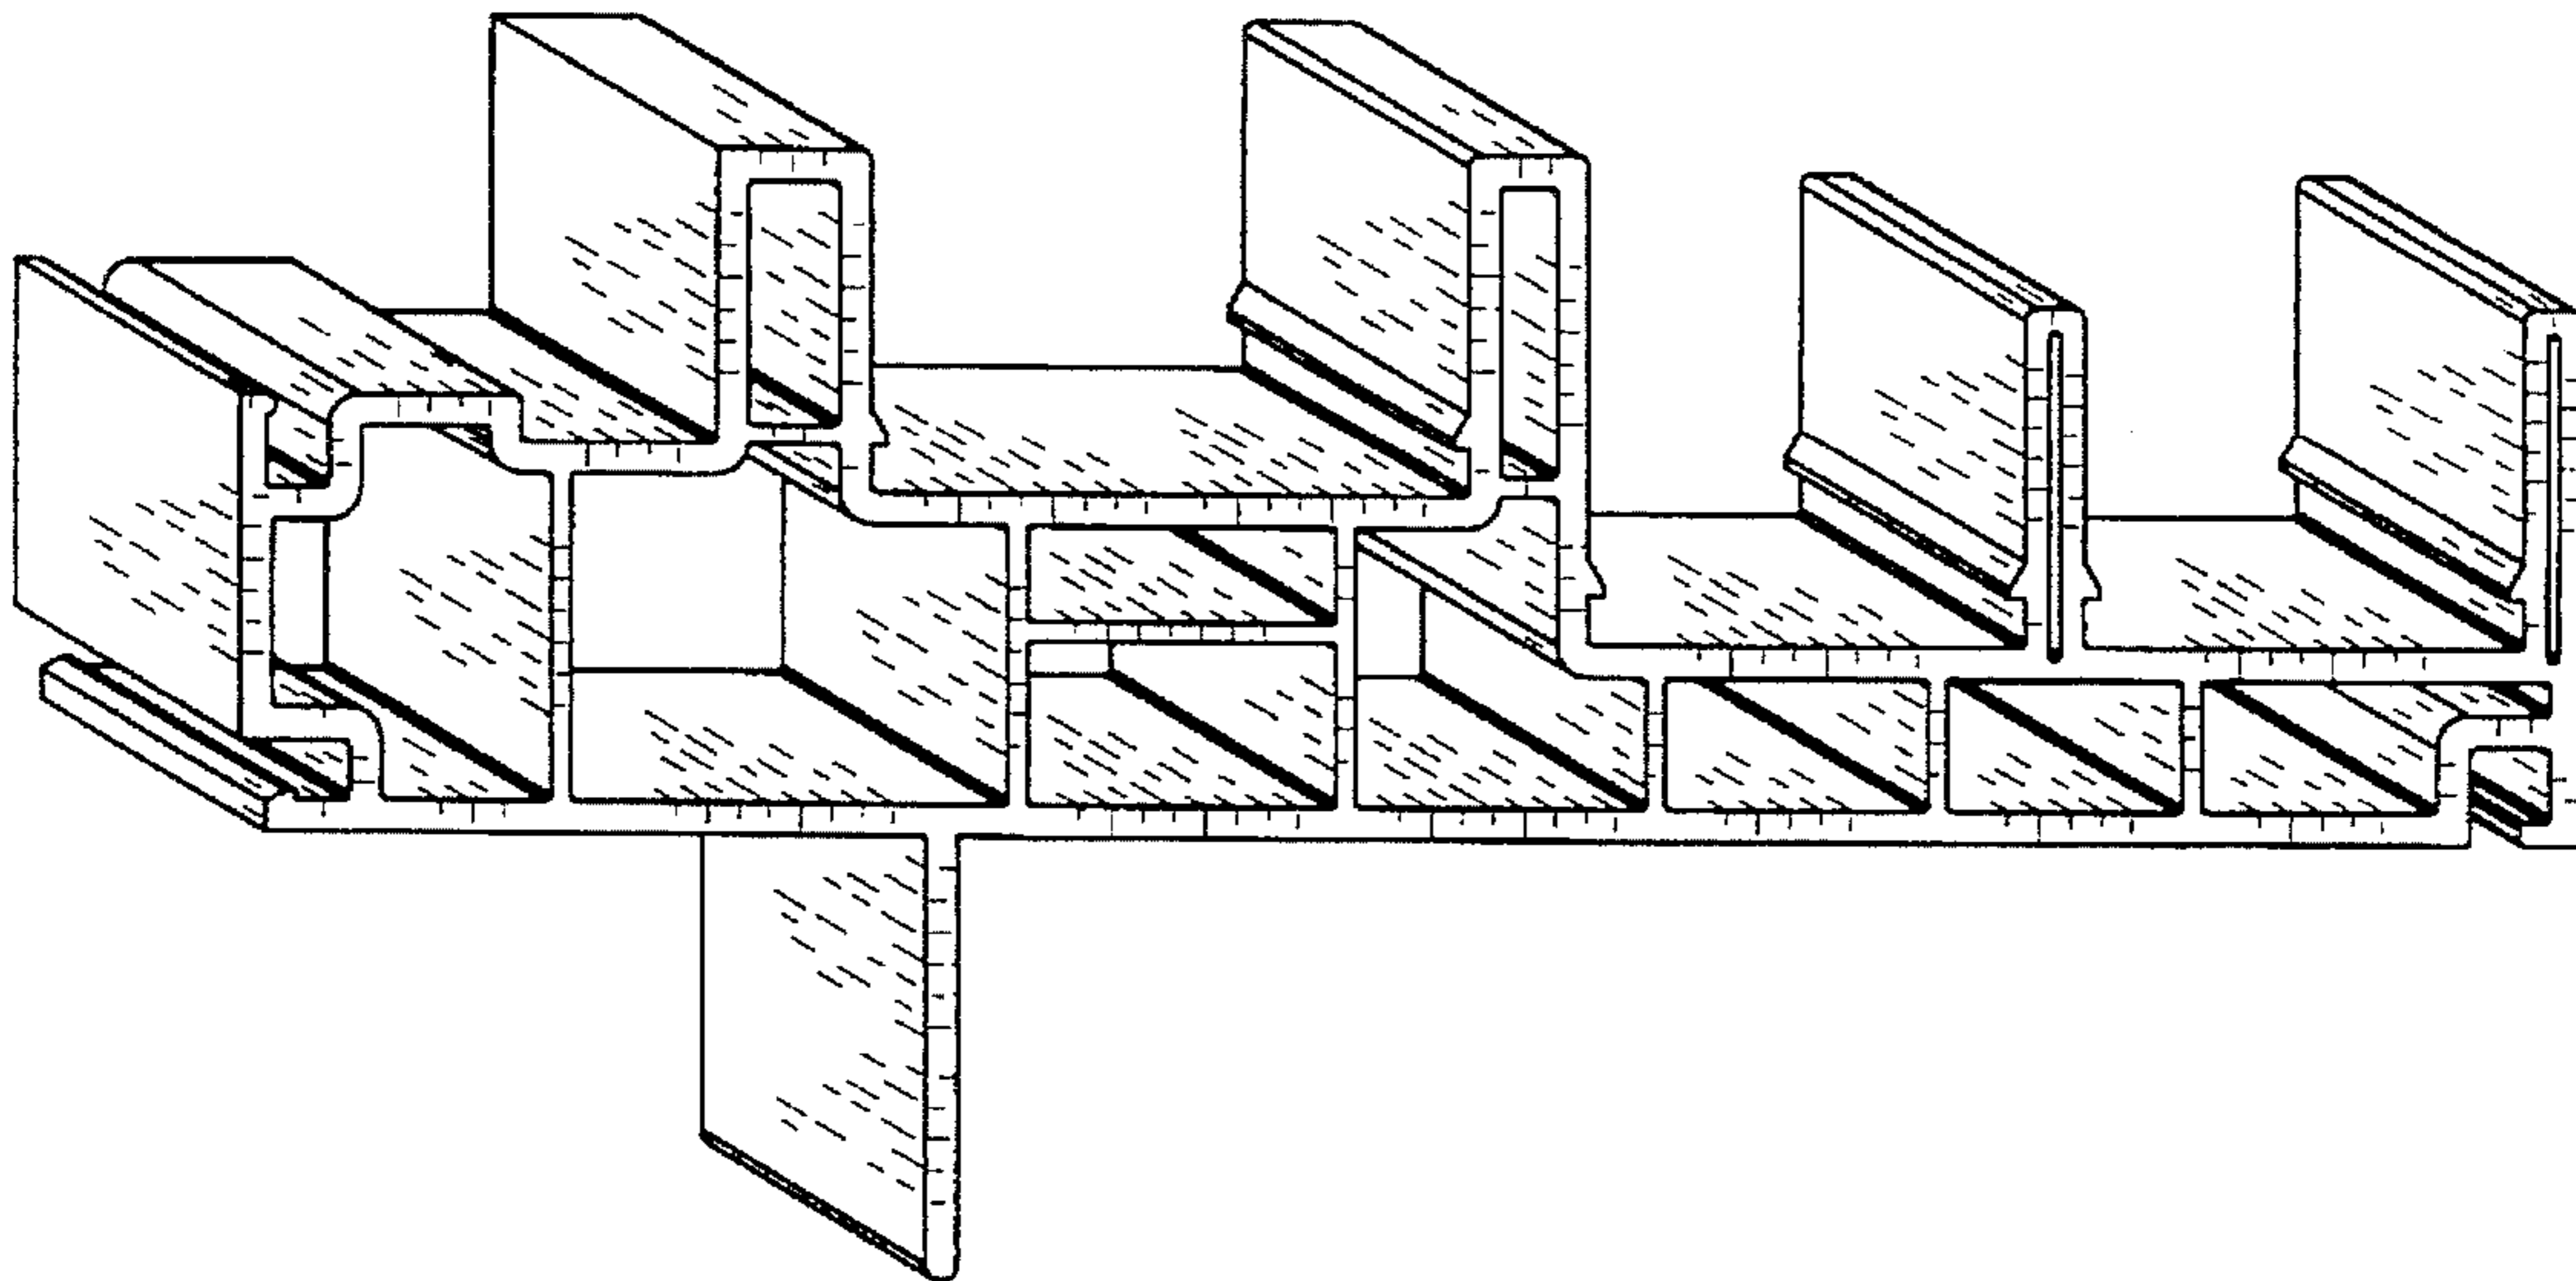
is a top right perspective view of a window component extrusion showing my new design, the window component extrusion being of indenfinite length; and, FIG. 2 is a bottom left perspective view thereof.
